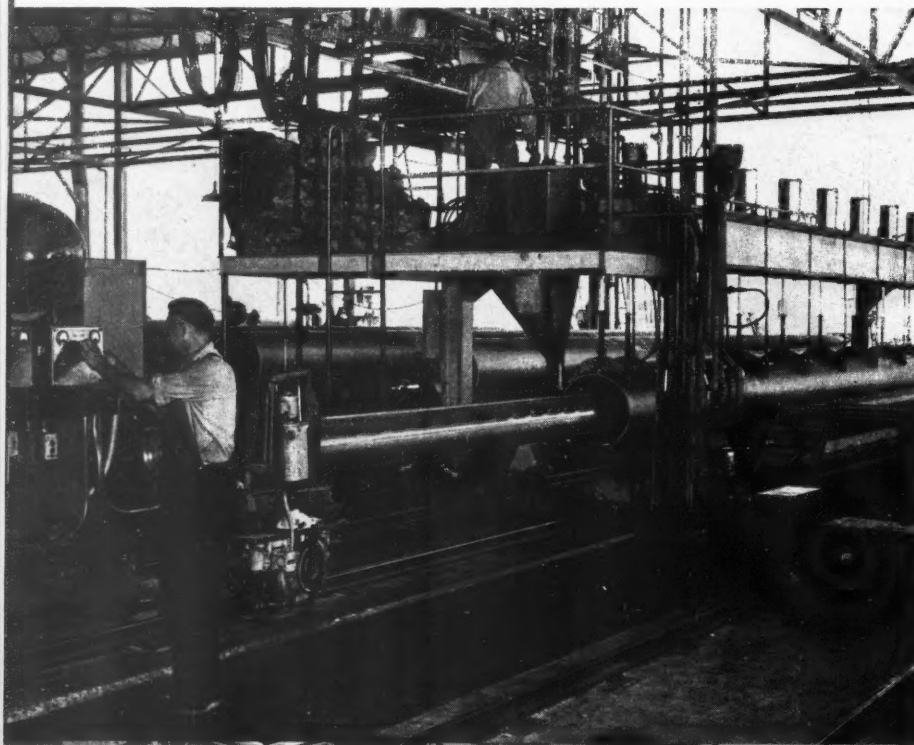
Twenty-inch pipe being welded by the submerged-arc method in a Berkeley machine, which, like the Yoder machine, completely welds the pipe in one operation
